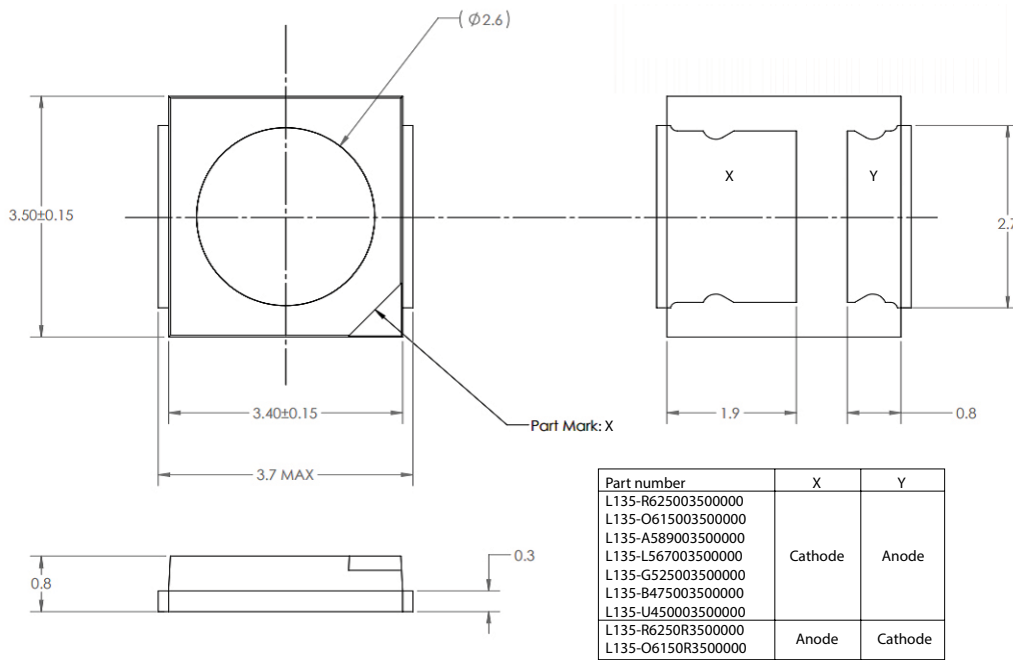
Mechanical dimensions for LUXEON 3535L Color Line.
